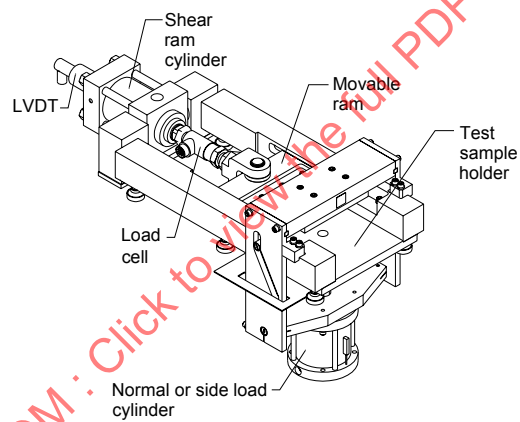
DISC BRAKE SHEAR TEST EQUIPMENT
